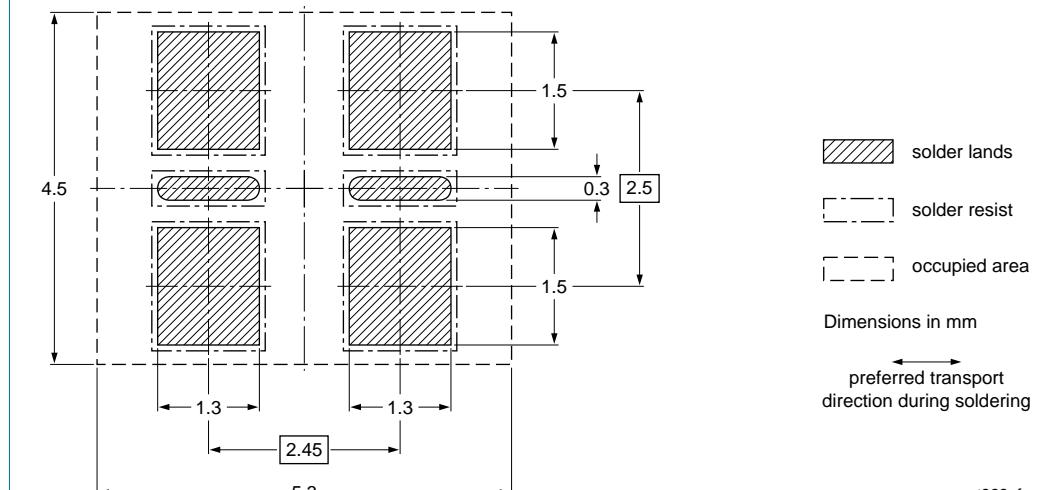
Wave soldering footprint PIMD2 (SOT457/SC-74)
